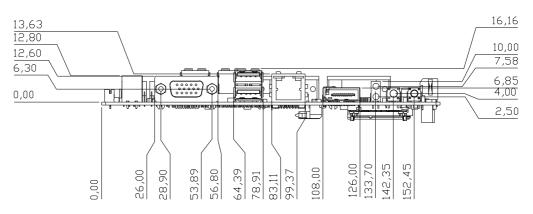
MIOe-DB2000 Mechanical Drawing (Front I/O)
